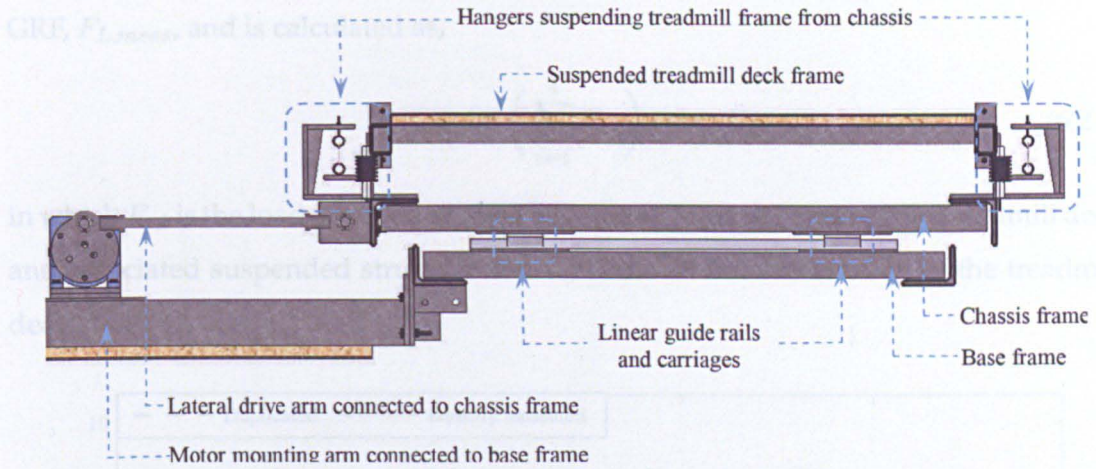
Section through treadmill rig showing three constituent frames (base, chassis and treadmill deck), lateral drive system, and lateral restraint of treadmill deck frame against chassis frame.
